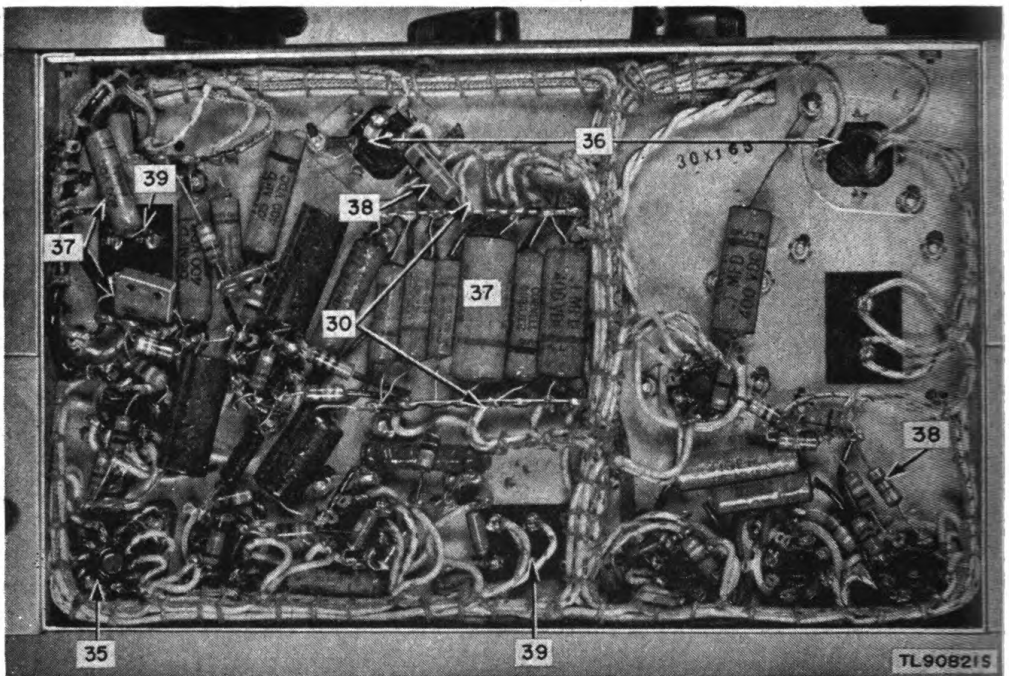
Amplifier-chassis parts to be maintained (bottom view).
